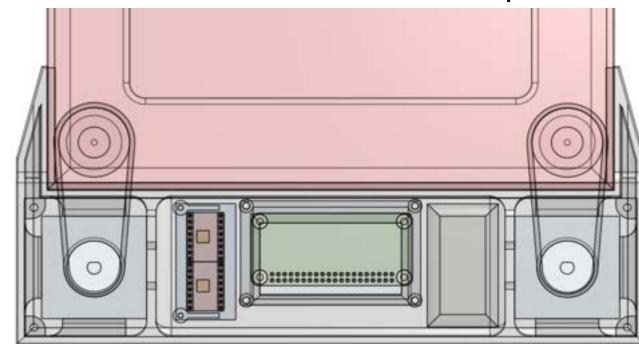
Back view of the Mech-a-Sketch design showing motors, electronics, and the case layout
